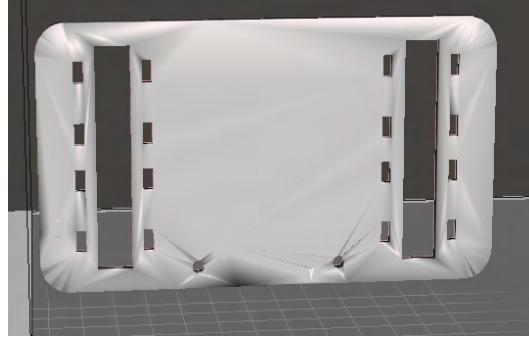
3D model of a cover of the Z-axis stepper motor
